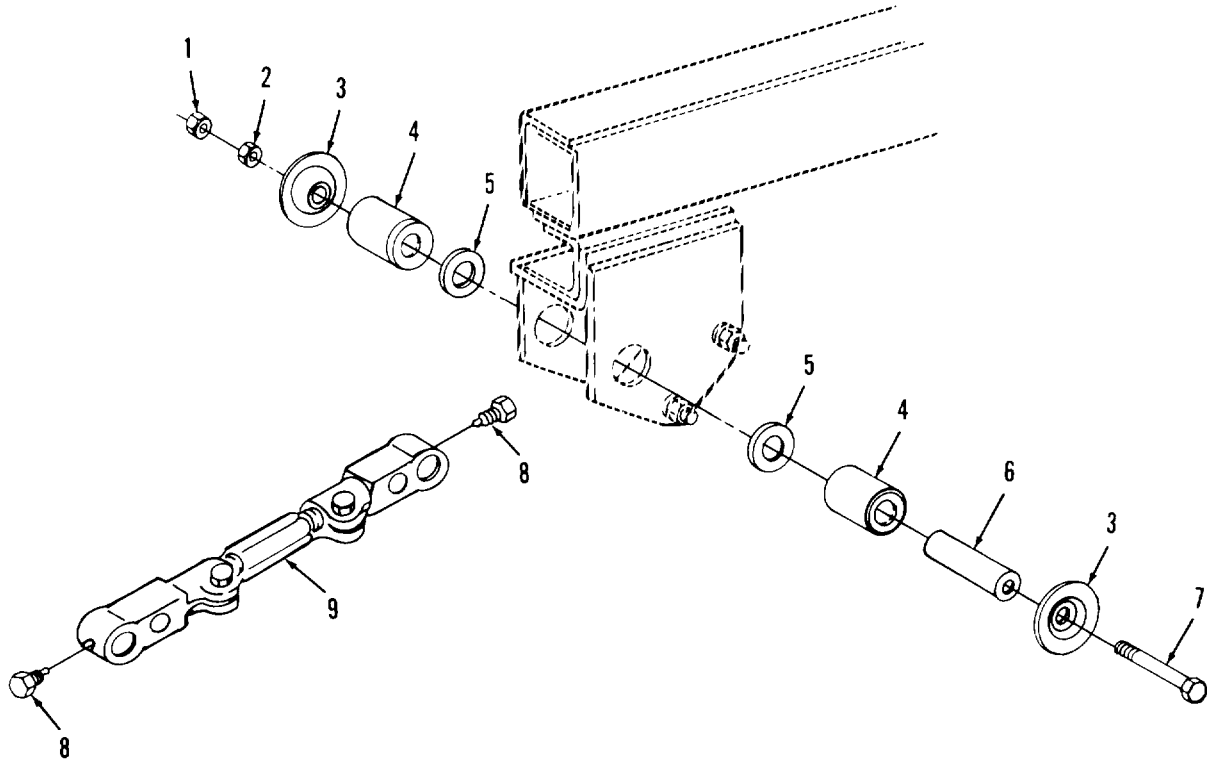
RADIUS ROD ASSEMBLY AND ASSOCIATED PARTS (M390C).
